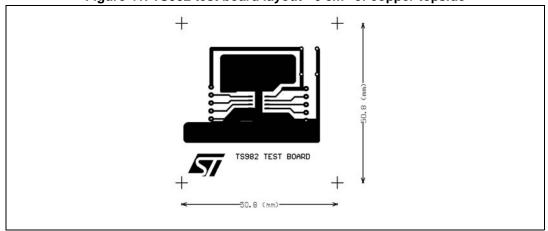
TS982 test board layout - 6 cm<sup>2</sup> of copper topside
